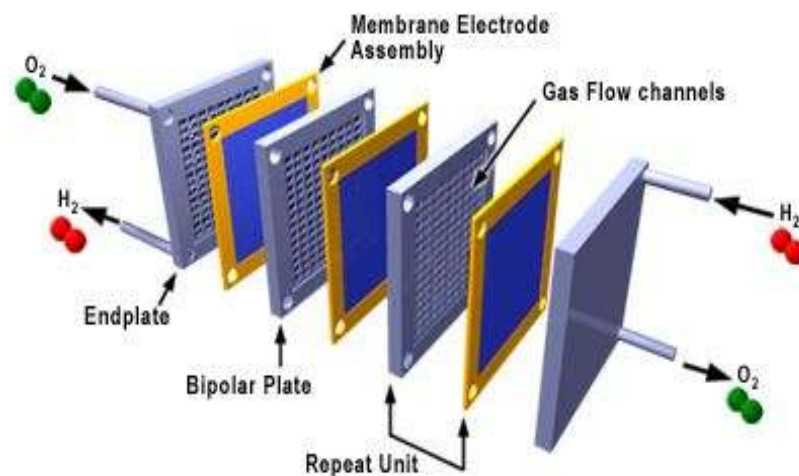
An exploded view of a polymer electrolyte membrane fuel cell stack [3]
